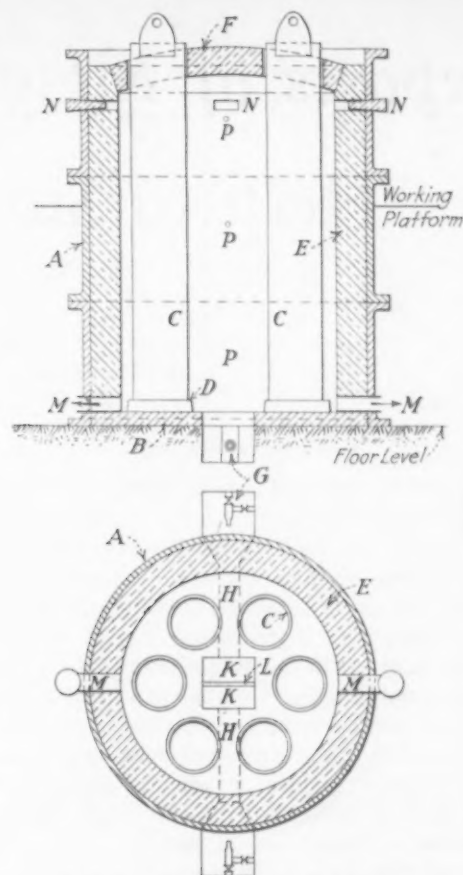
Plan and Elevation of Carburizing Furnace Made Up of Foundry Flasks
